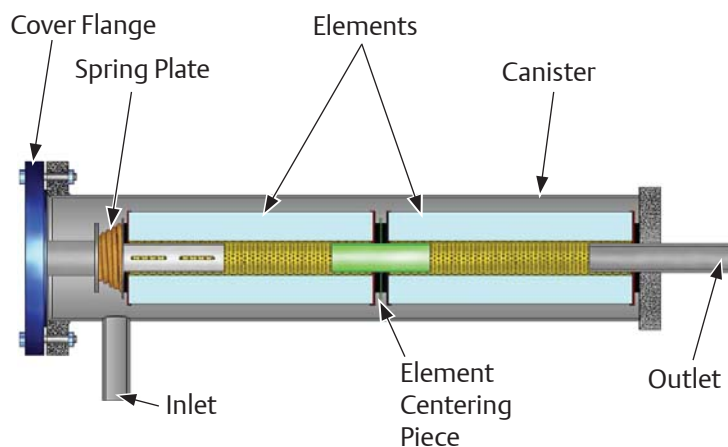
Oil Filter Assemblies (Single and Dual)
